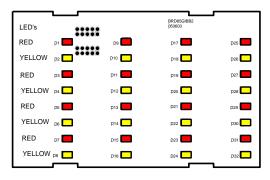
16 Zone Alarm / Fault Card Decal & PCB Layout
